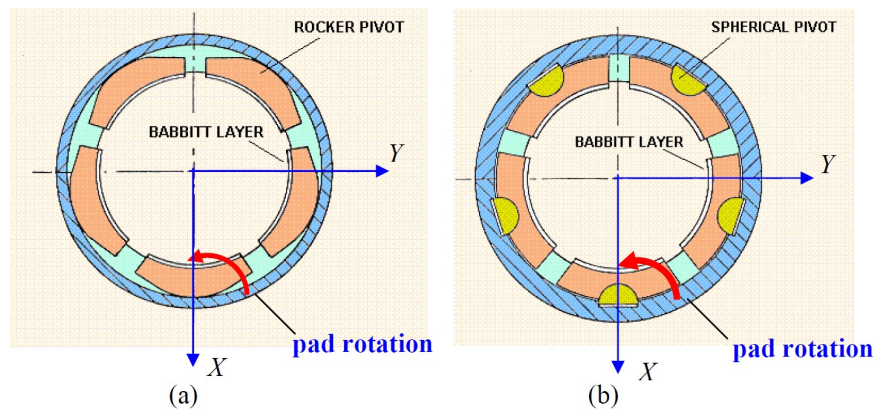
Rocker pivot (a) and spherical pivot (b) in a tilting pad journal bearing [5].
